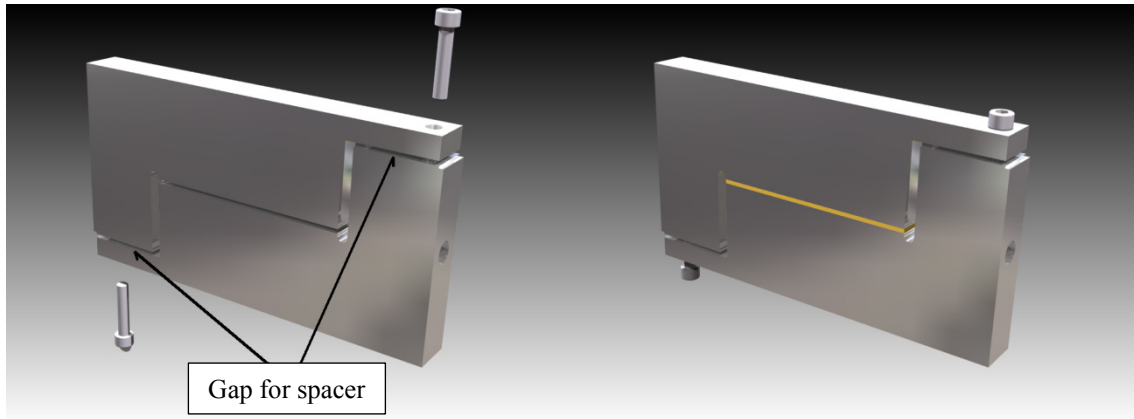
Assembling (left) and bonding (right) of the PU-AlMg3 shear specimens [1]
